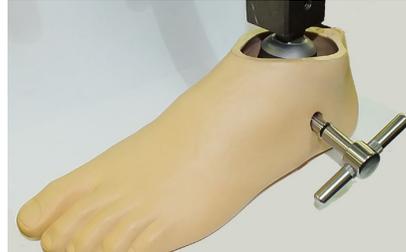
B: Pushing the axis assembly through the ankle joint.
